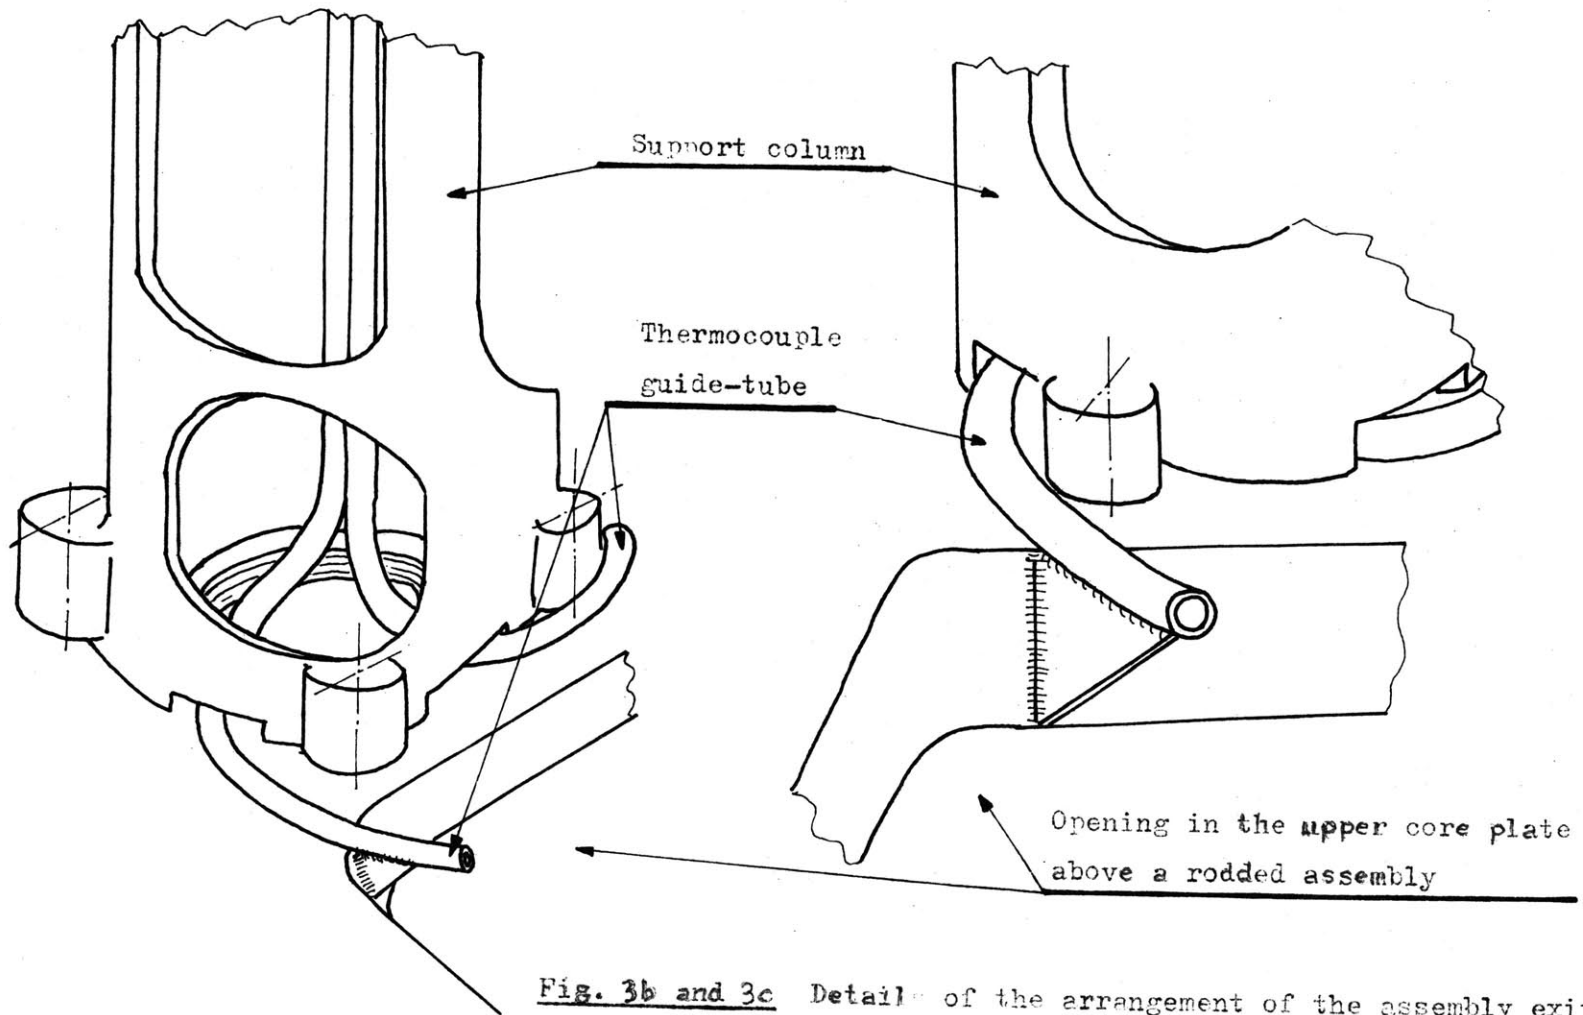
and 3c Details of the arrangement of the assembly exit thermocouple on the upper core plate.
